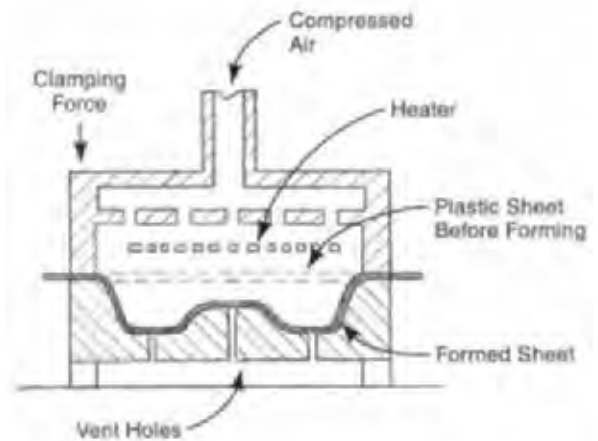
D2 Pressure forming is similar to vacuum forming except that the pressure differential across the sheet is achieved by positive pressure rather than a vacuum.
